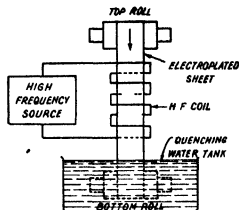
Finishing tin-plated sheets by H F heating. The electroplated sheet is made to pass through a coil carrying h f current. The coating thereby melts and is uniformly spread over the surface.
